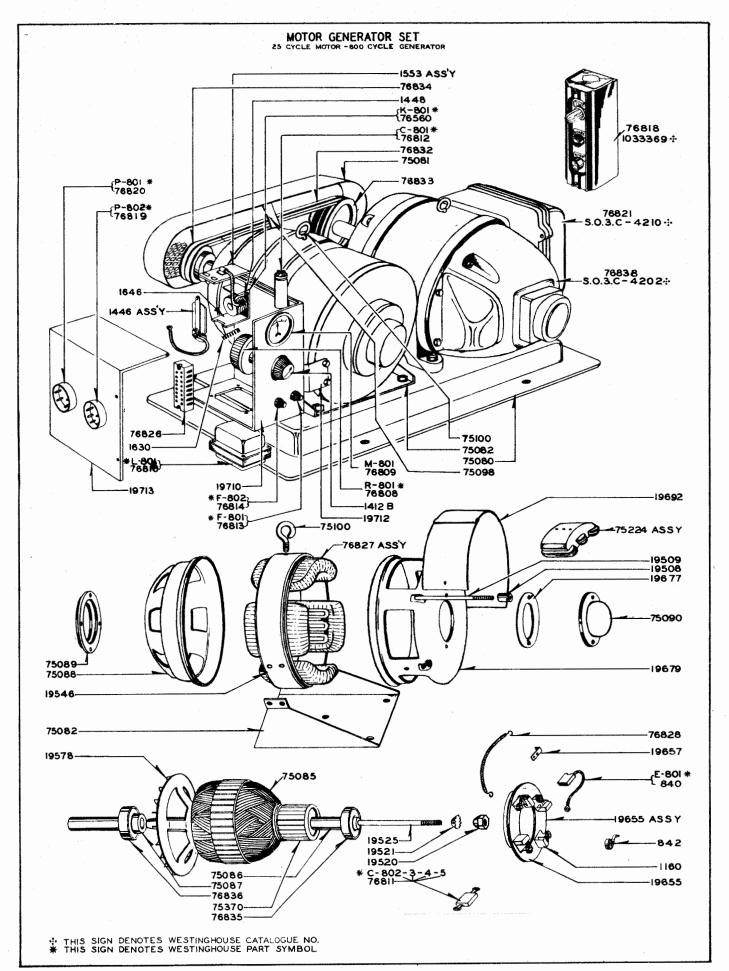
Motor Generator Parts for Motor Generator Set Type CDO-21652.
